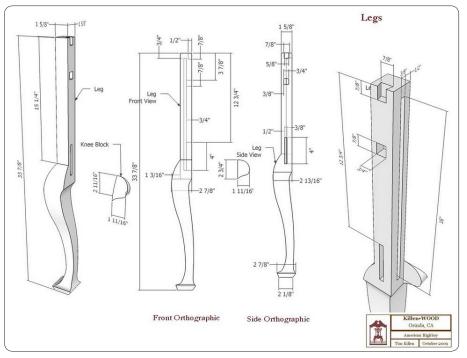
These drawings of a cabriole leg show SketchUp's versatility. You can show the overall component with dimensions, in two-dimensional views, or in perspective views to show complete details of the joints, such as the dovetail socket and mortises.
